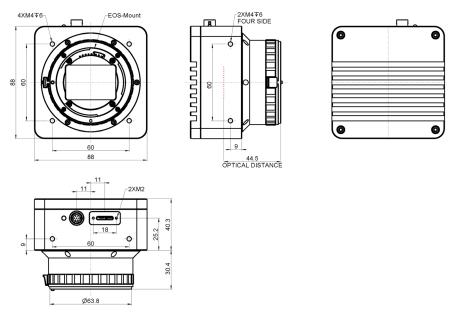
Dimensions of IUCXXX-AFU-EF camera housing (mm)
